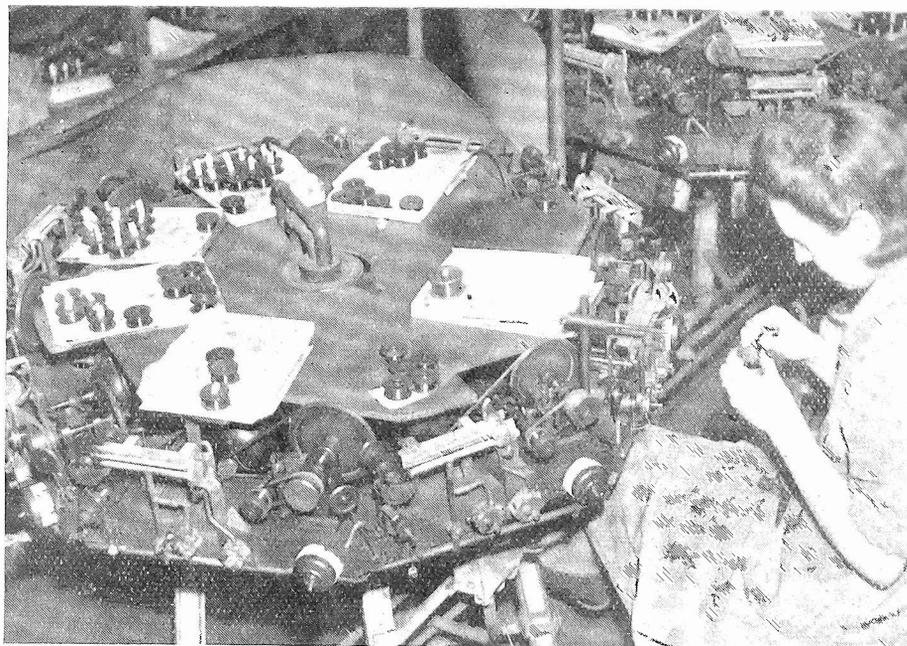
Drawing to the finest sizes is done on tiny machines mounted on round rotating tables
